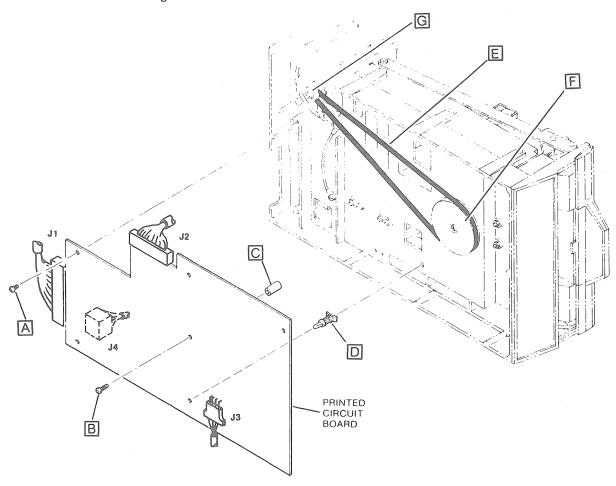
PRINTED CIRCUIT BOARD (PCB) AND DRIVE BELT REMOVAL AND REPLACEMENT
